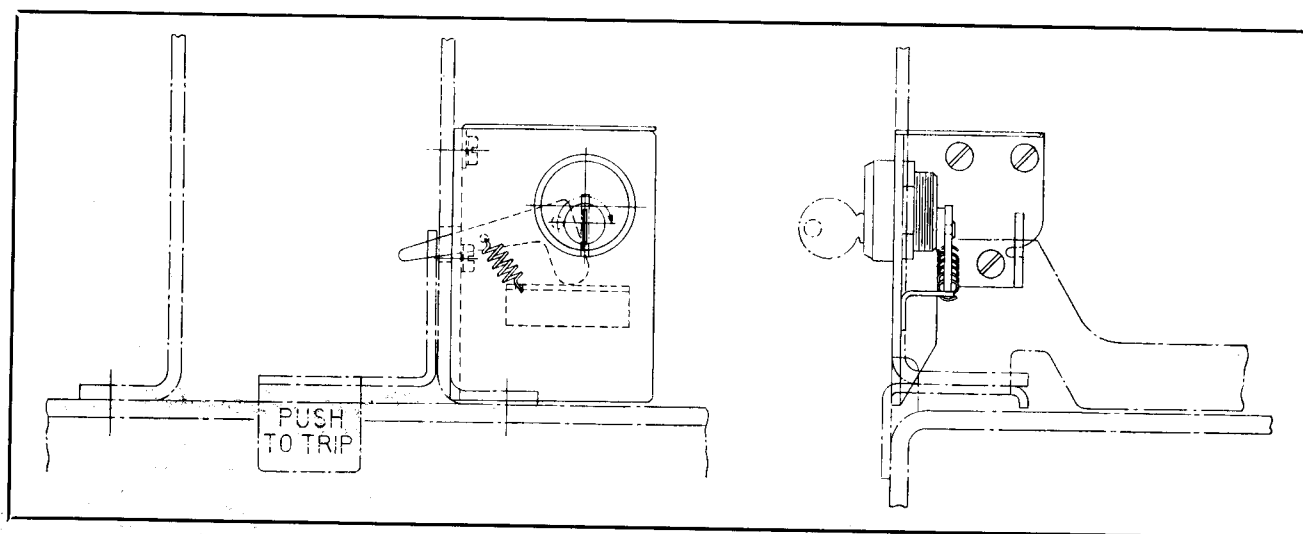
Key Lock or Key Interlock Attachment—Construction Details
